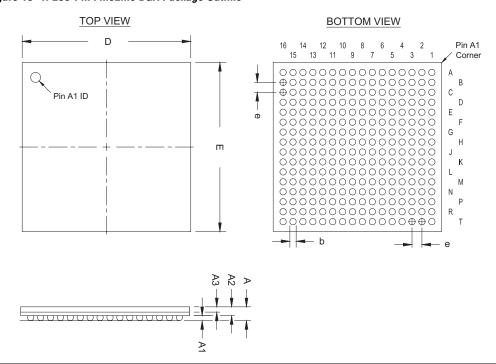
shows a 256-pin FineLine BGA package outline.
